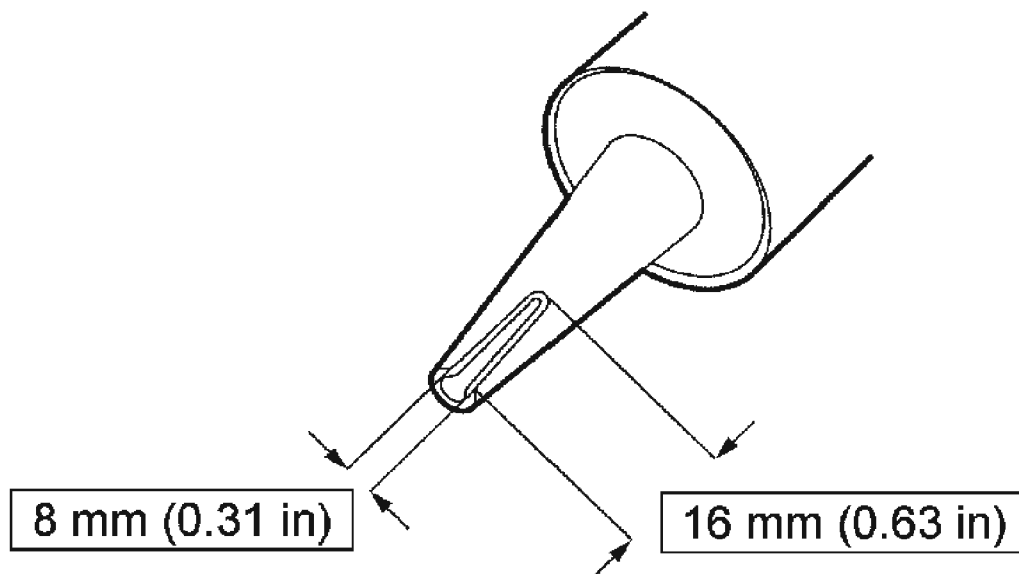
Trimming Pinch Weld Urethane Adhesive
